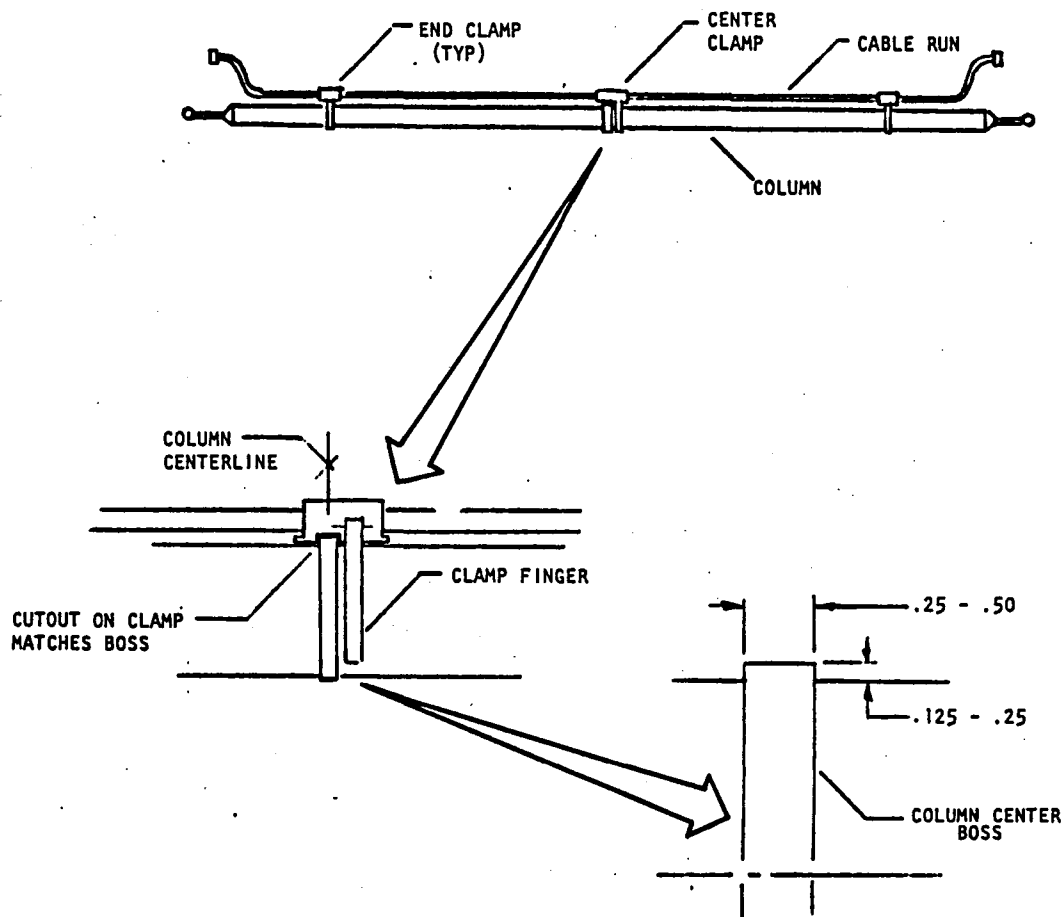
Axial Rigidizing of Cable Clamp Sleeve
